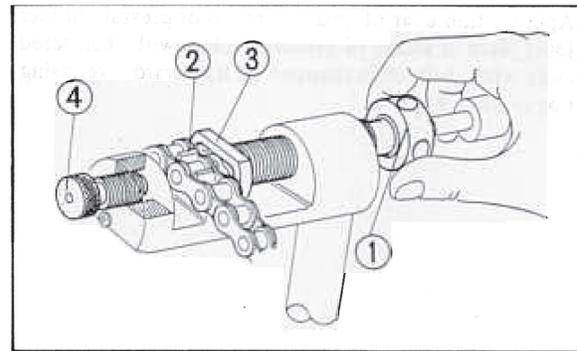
(1) Pressure bolt (2) Chain holder (3) Pressure holder (4) Adjuster bolt
